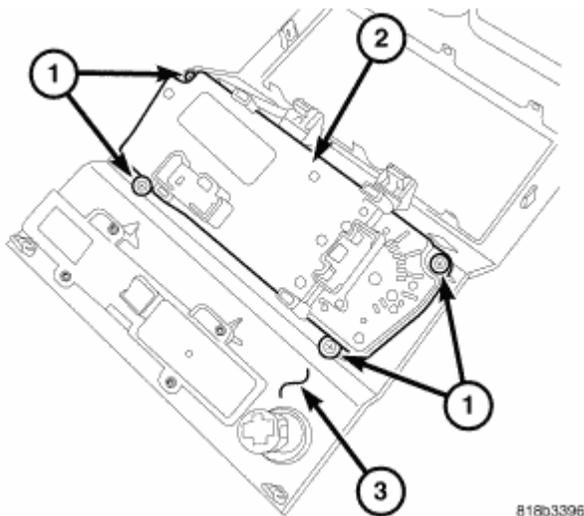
Removing/Installing Four Screws That Secure A/C-Heater Control To Instrument Panel Center Bezel
